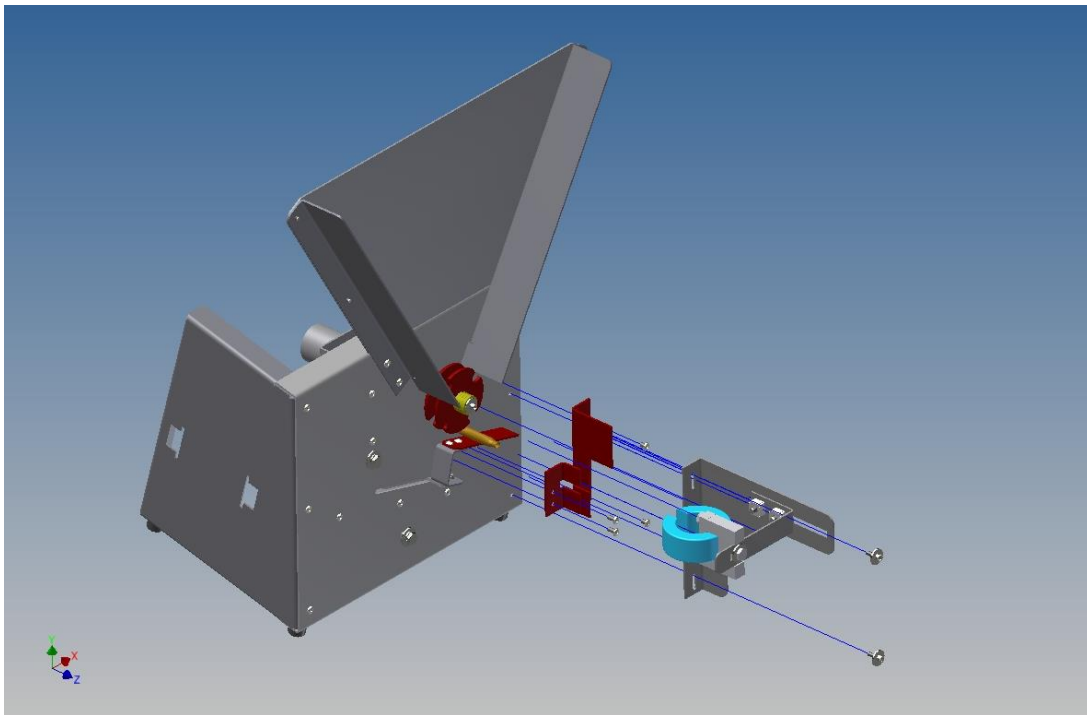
Front view showing the lower guide pieces and bracket assembly to mount the ferrite core.
